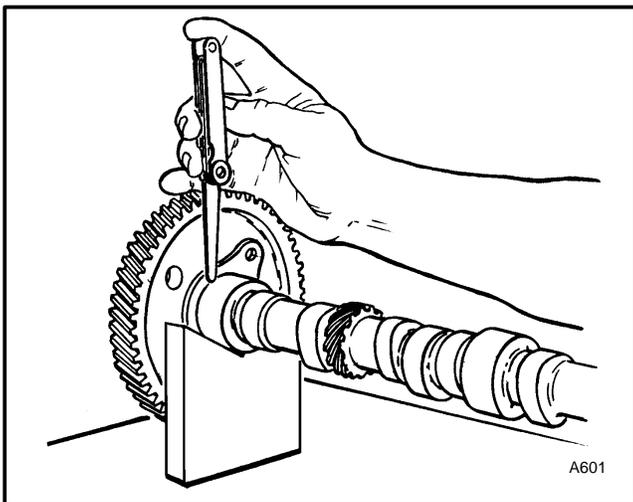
CHECK THE CLEARANCE BETWEEN THRUST PLATE AND THE CAMSHAFT
